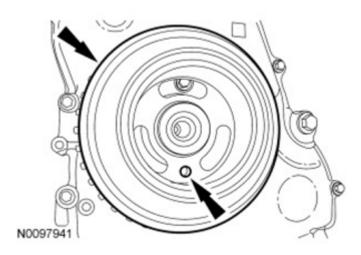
Locating Crankshaft Pulley Hole Courtesy of FORD MOTOR CO.
